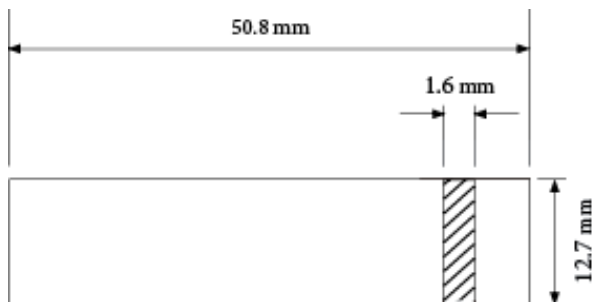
Dimensions of the test specimen for bending according to ASTM D790.
